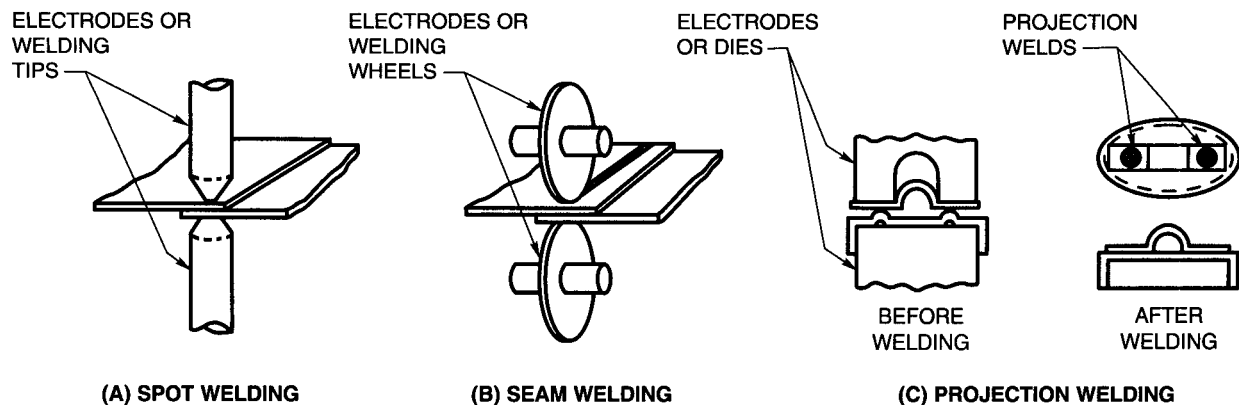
Simplified Diagrams Showing the Basic Processes of Spot, Seam, and Projection Welding
